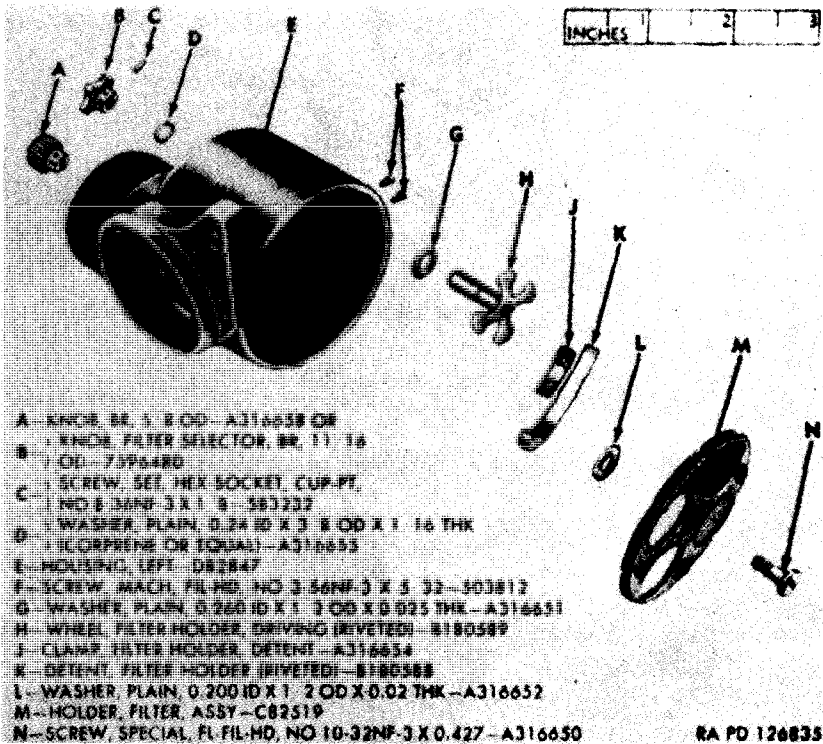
Left housing with filter holder assembly C82518 - exploded view.
